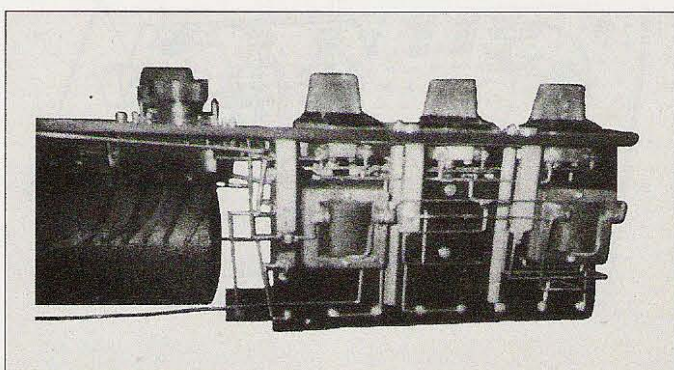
Photo F. Construction technique of routing bare wire between connect points. Heavy-gauge wire was used to maintain mechanical separation and support.
